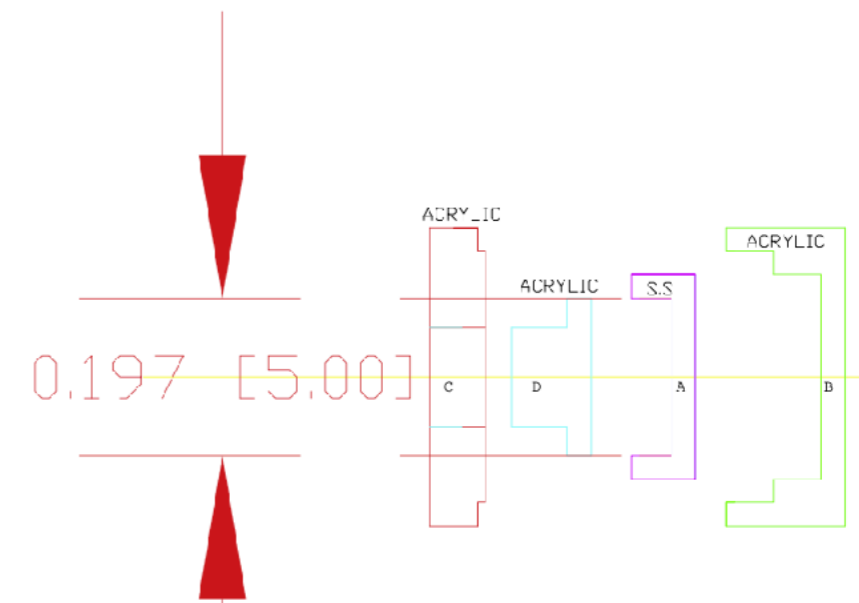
Mechanical drawing of the  $^{241}\text{Am}-^{13}\text{C}$  source assembly. See text for more details.
